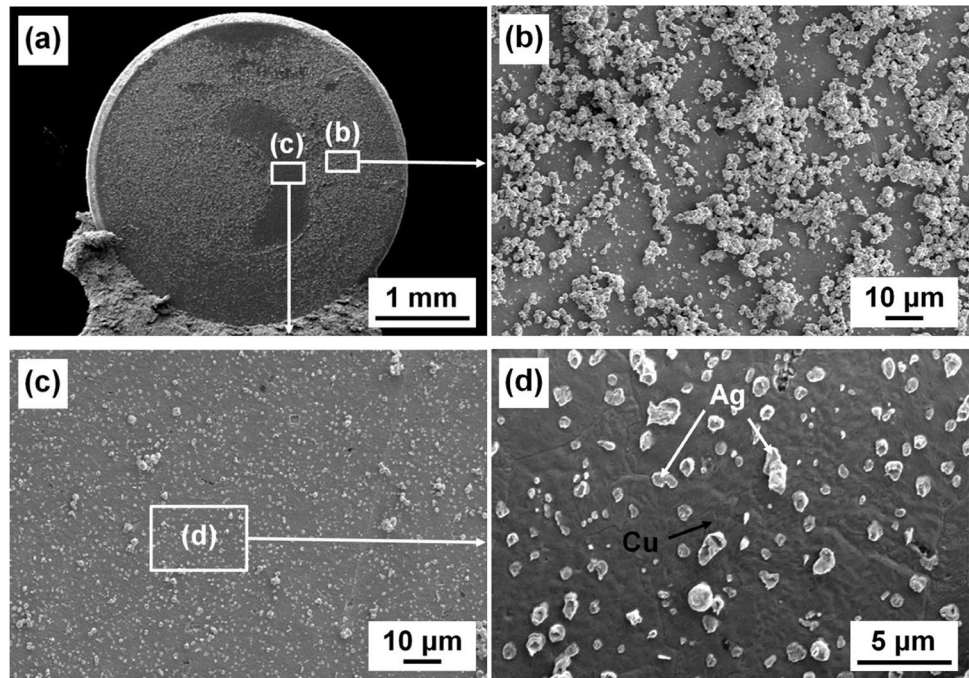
shows the fracture surface of the top Cu disk in detail. Figure 12a displays the entire fracture surface
